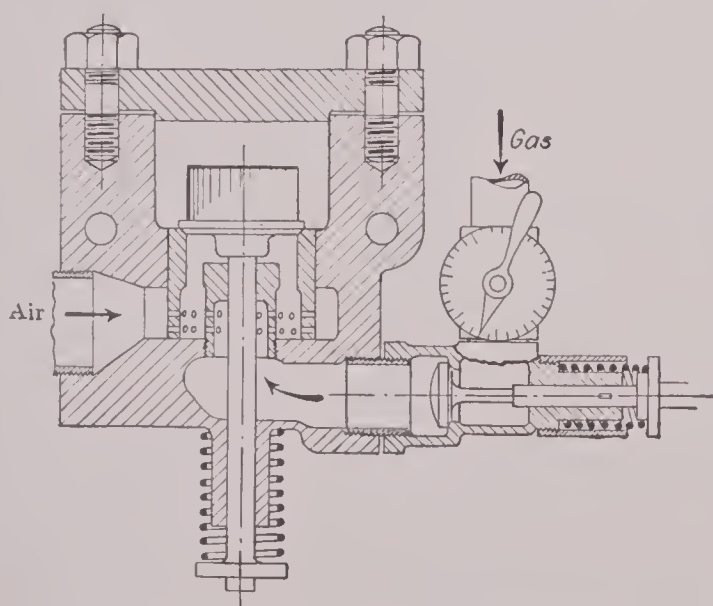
Inlet and Mixing Valve combined with Governing Valve, Brombacher Type.
